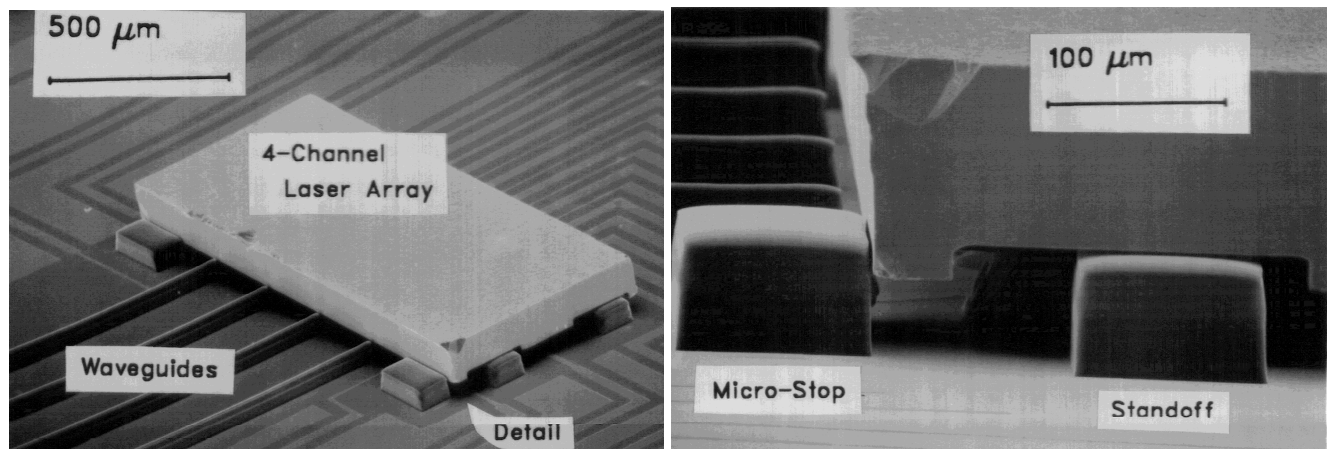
Four-channel laser array using two mechanical stops and misaligned solder joints.
